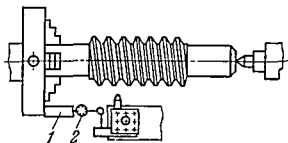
Indexing in cutting multiple threads by axial adjustment of the chasing tool
